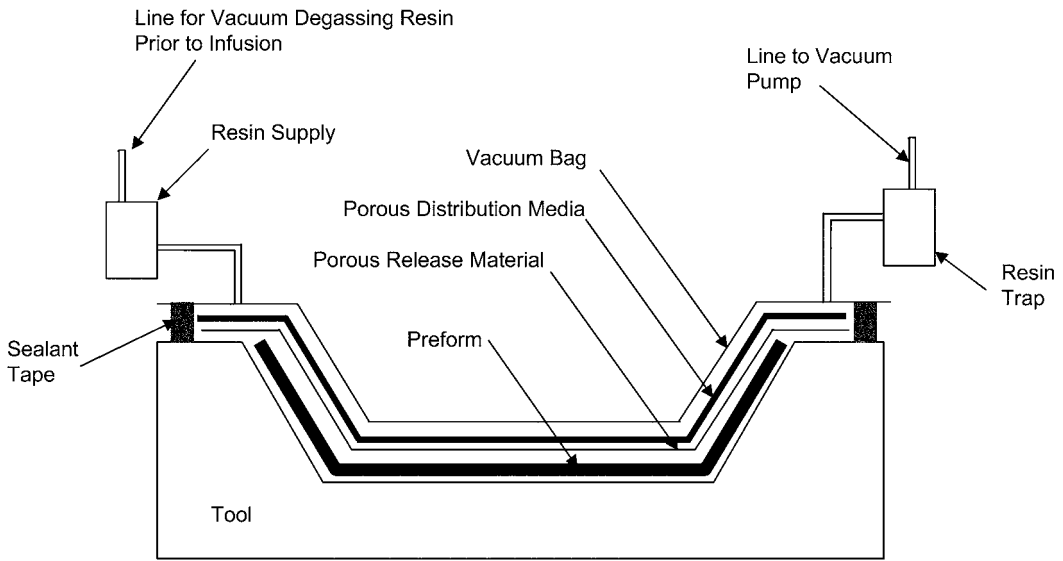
Typical vacuum-assisted resin transfer molding (VARTM) process setup
